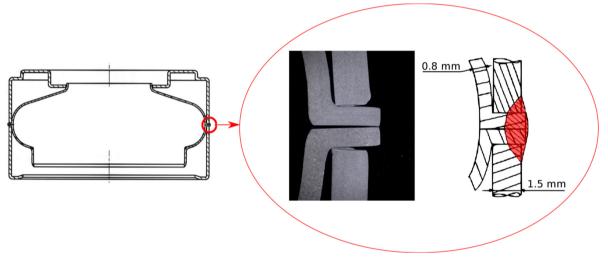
Cross section of the four sheets to be joined and a magnification of the weld and the physical joining.
